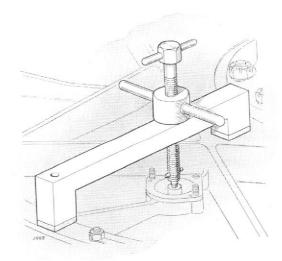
Removing an inspection cover from the sealing plate, using extractor T.76563.
